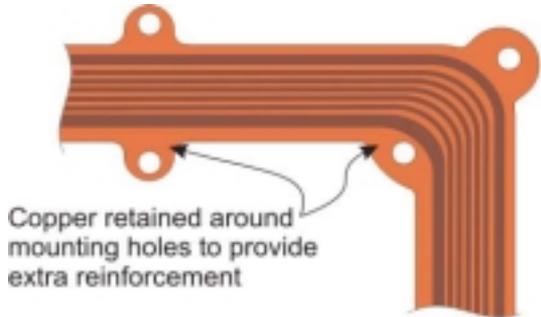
Mounting holes should retain copper when flex circuit is to be mounted without mechanical support.
